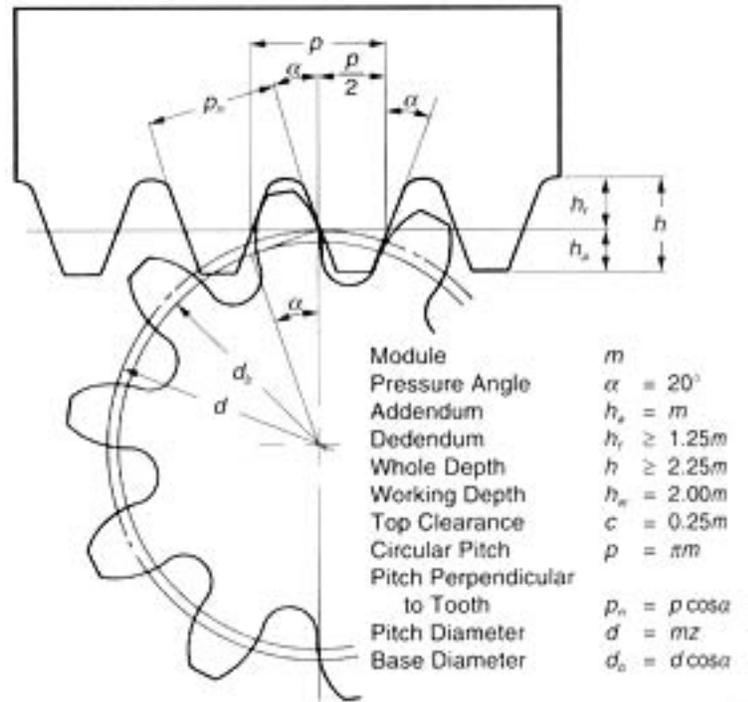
The Tooth Profile and Dimension of Standard Rack
